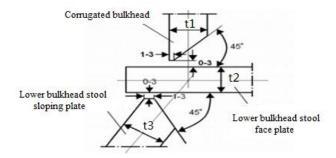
A.3 Joint design in way of face plate of lower bulkhead stool of corrugated bulkhead
